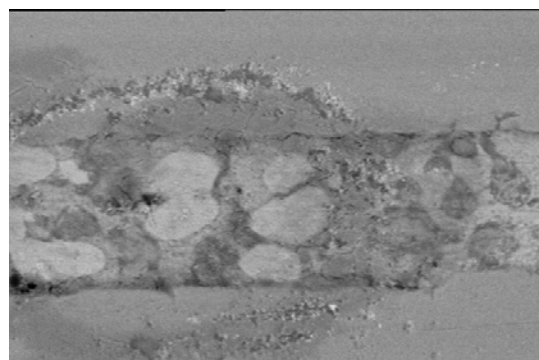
SS/SS joint cross section with U/S prewetted S-Bond 400.
